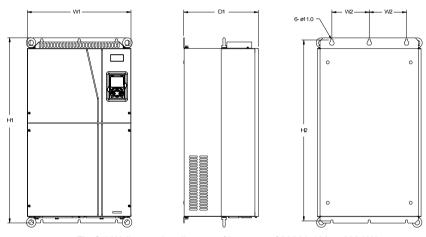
Wall-mounting diagram of inverters of 380 V, 132 to 200 kW
